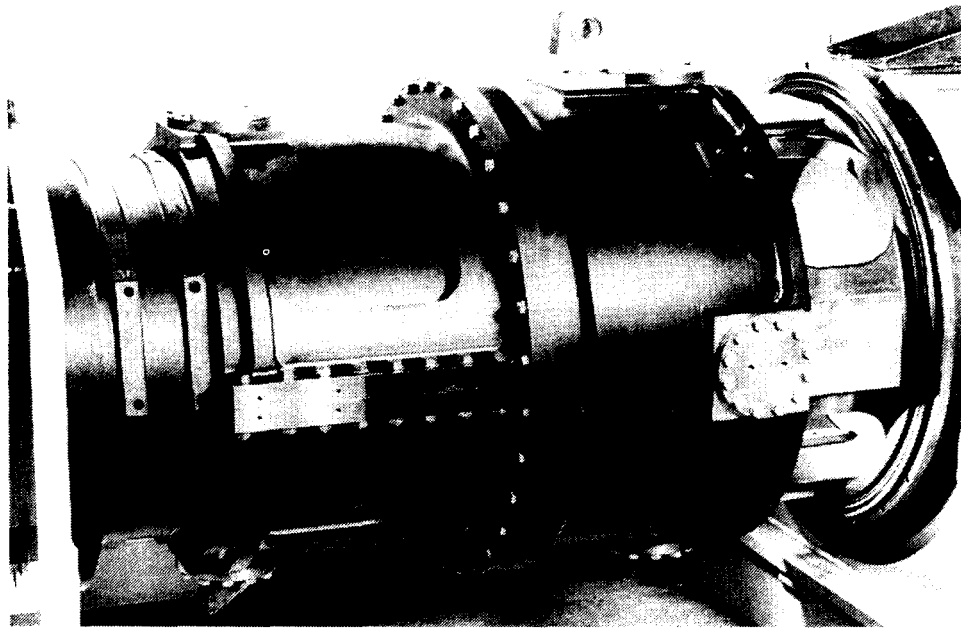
TORPEDO TUBE SLIDE VALVE ASSEMBLY IN OPEN POSITION
